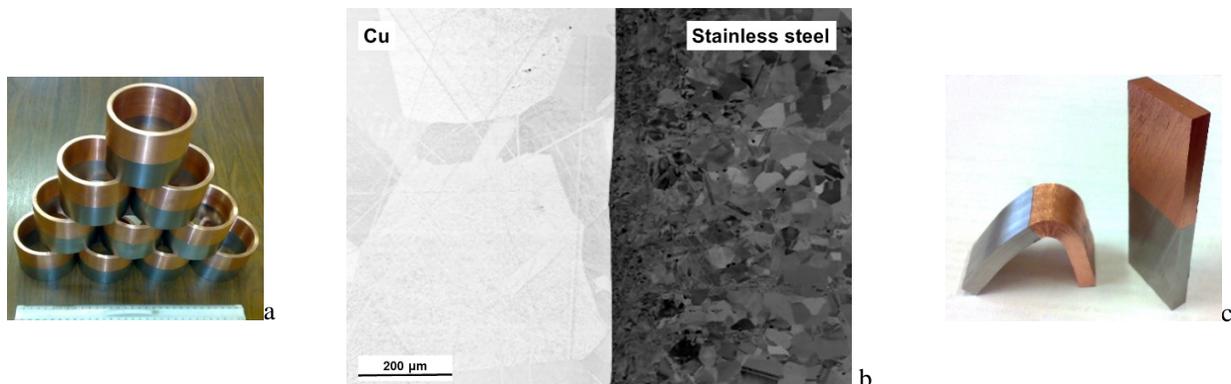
Copper-to-stainless steel adapter (a); micrograph of the transitional layer (b); a 7x30x80 mm test piece before and after bending tests (c) [4].
